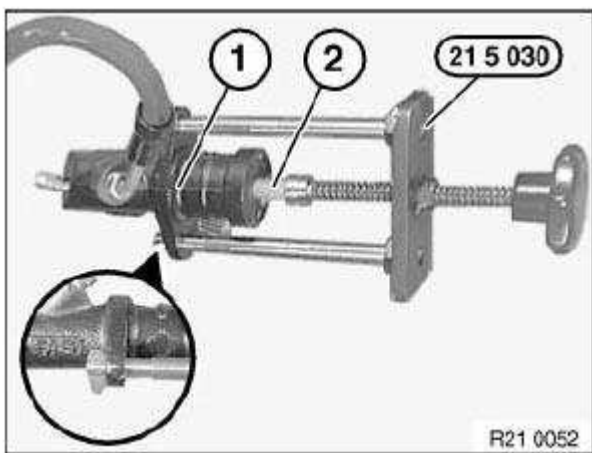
Special Tool 21 5 030, Clutch Slave Cylinder And Piston Rod
